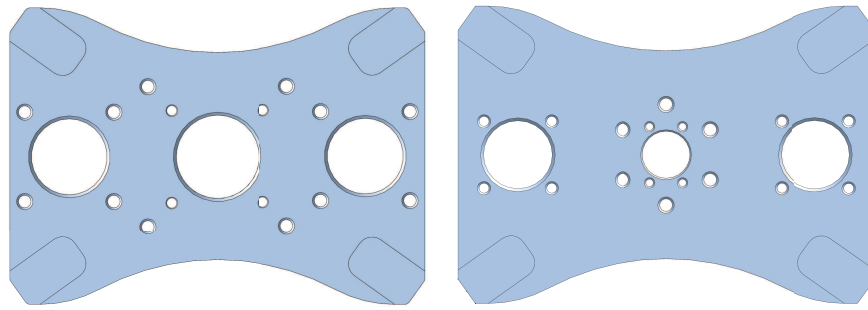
(a) Motor platform where the stepper motor KSS ReMoBo 1020B-300 is fixed. (b) Translating platform where the nut and the flange housings IGUS FJUM-12 are fixed.
